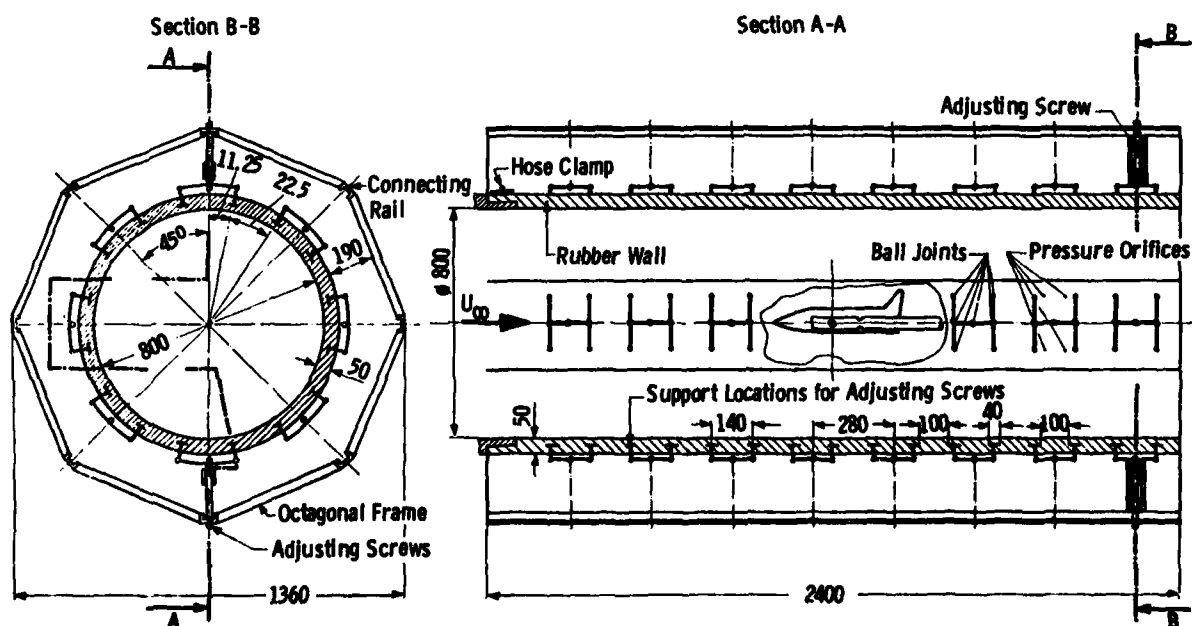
DFVLR Test Section with Expandable (Rubber) Walls
